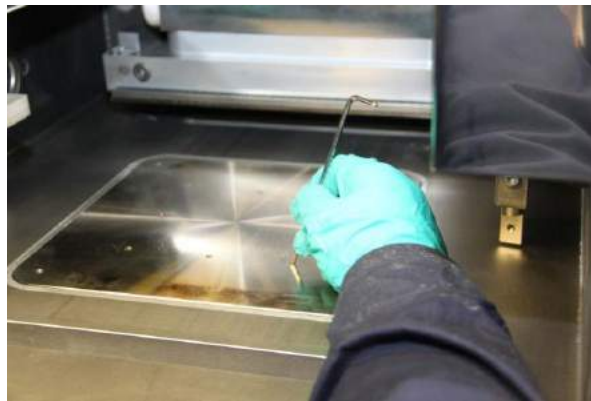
Prod bolt holes to loosen compacted powder and then vacuum
